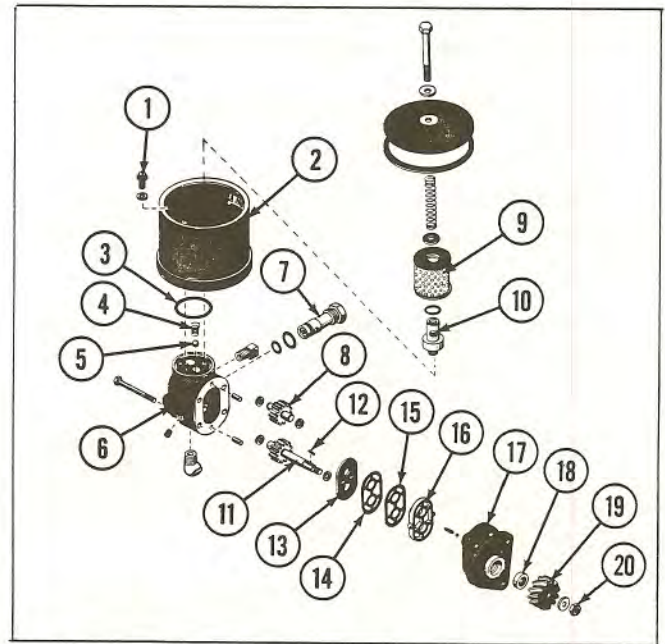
Cessna Power Steering Pump - Identification and Sequence of Parts
